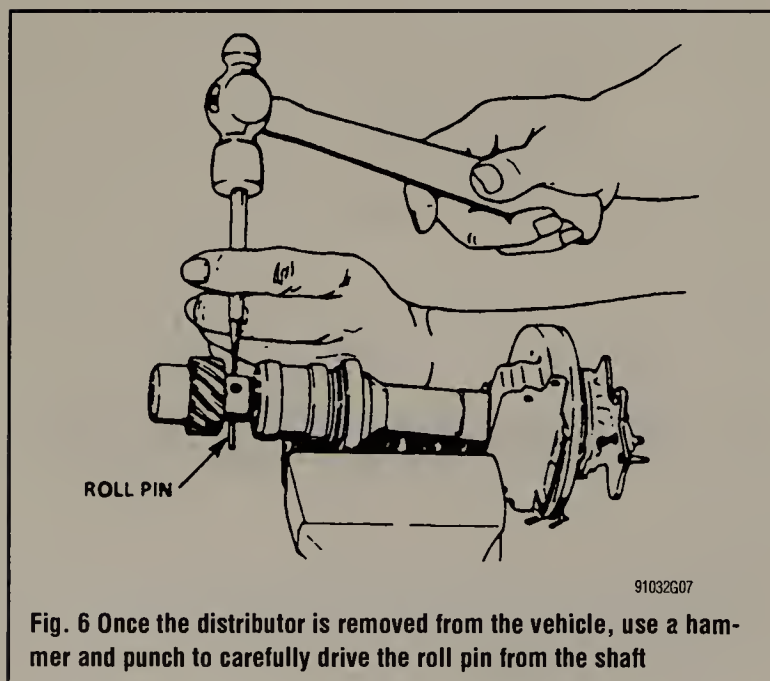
Once the distributor is removed from the vehicle, use a hammer and punch to carefully drive the roll pin from the shaft
